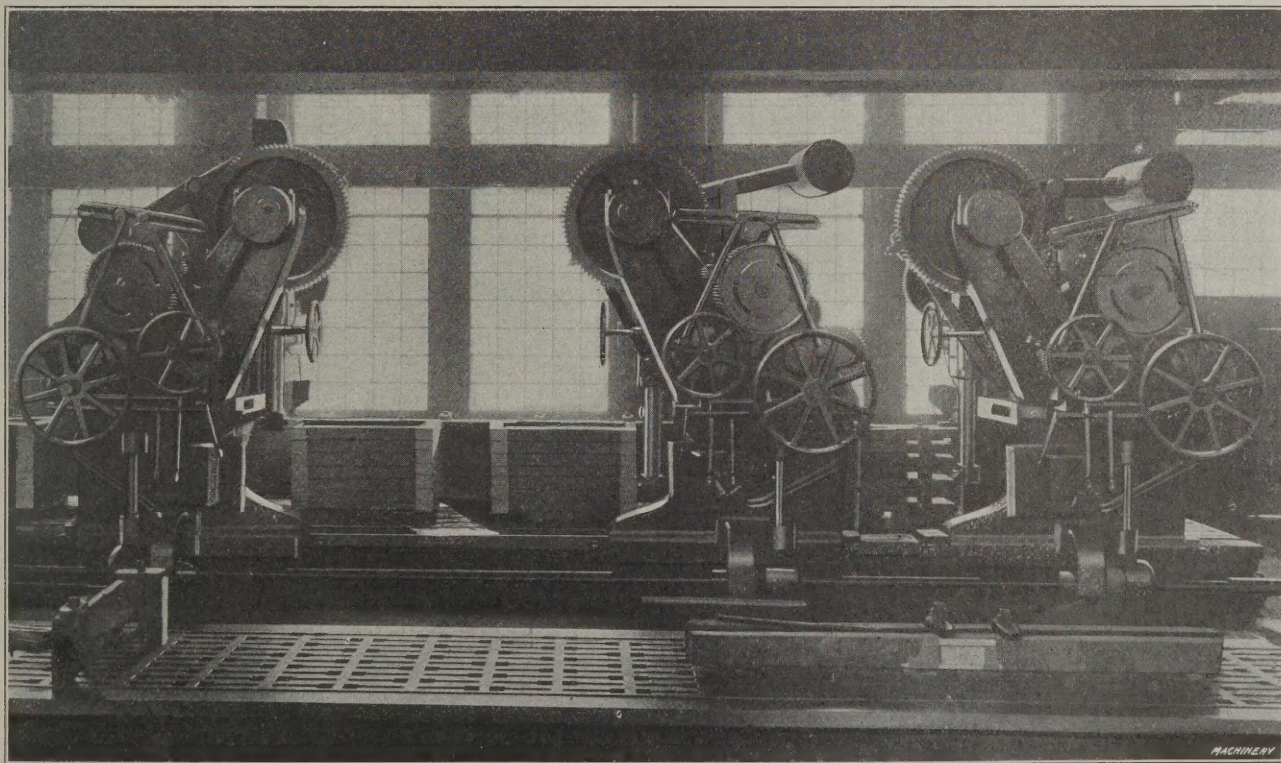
Large Three-head Slotter used for Slotting the Jaws of Locomotive Frames
